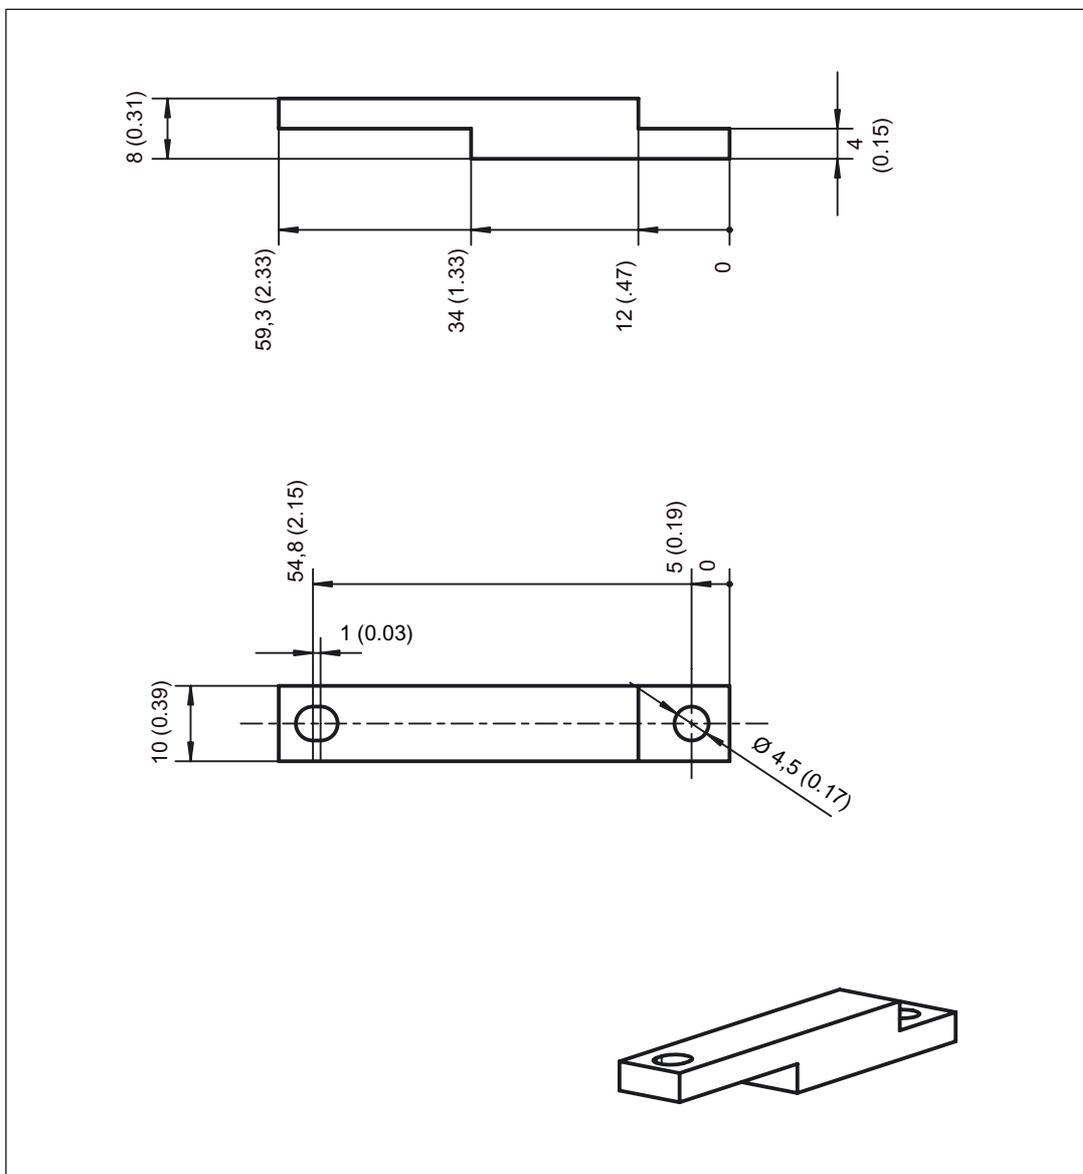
Dimension drawing of reinforced DC-link busbar 50 mm, all dimensions in mm and (inches)
